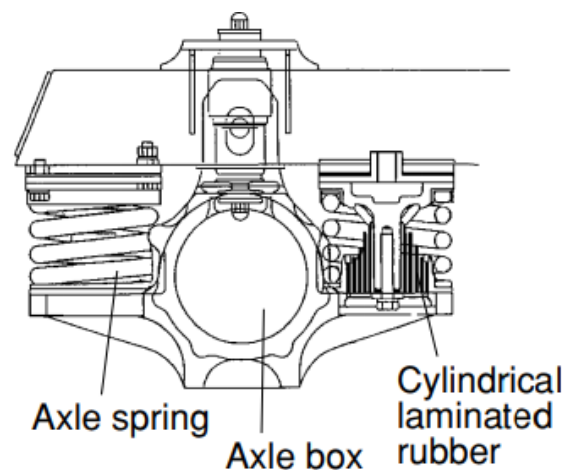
Cylindrical laminated rubber inside spring coils [2, p. 69]
